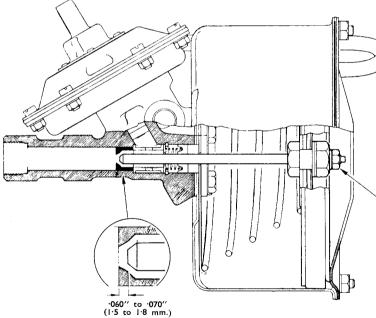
When assembled there must be .060" to .070" (1.5 to 1.8 mm.) clearance between the end of the push-rod and the piston. The clearance is adjusted by means of a screwdriver at the point indicated by the arrow.
